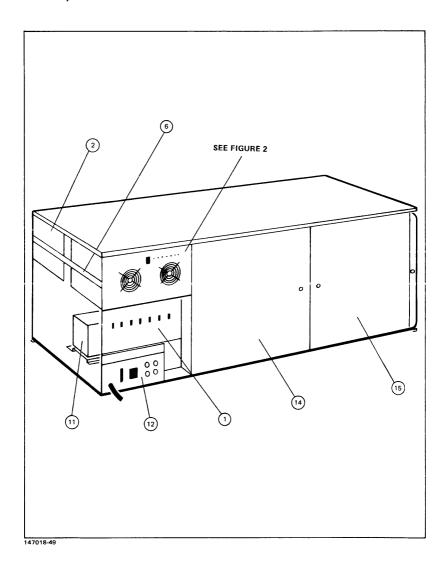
HP 3000 Series 33 Rear View (Sheet 2 of 3)
